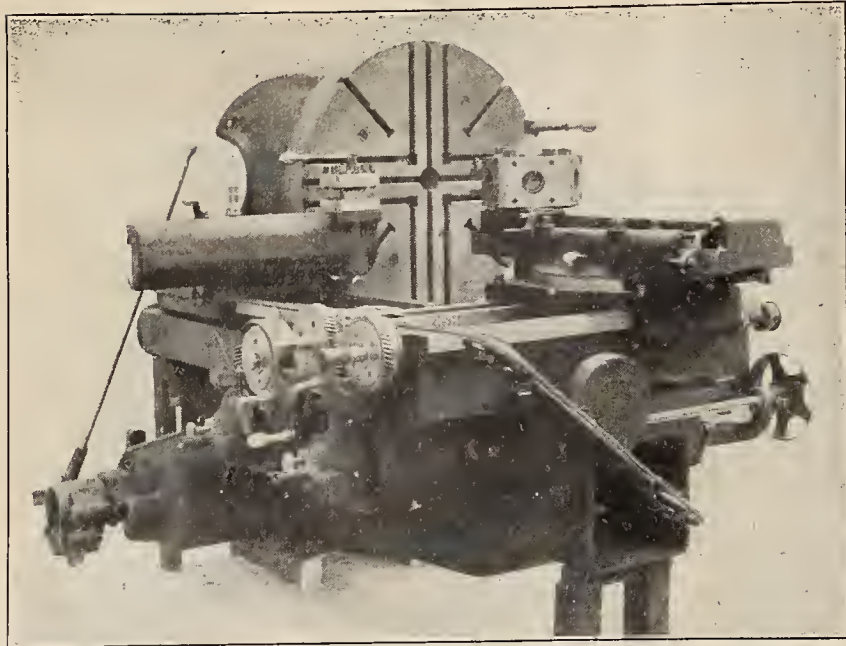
TOP VIEW OF THE BULLARD MACHINE TOOL Co.'s VERTICAL TURRET LATHE.
